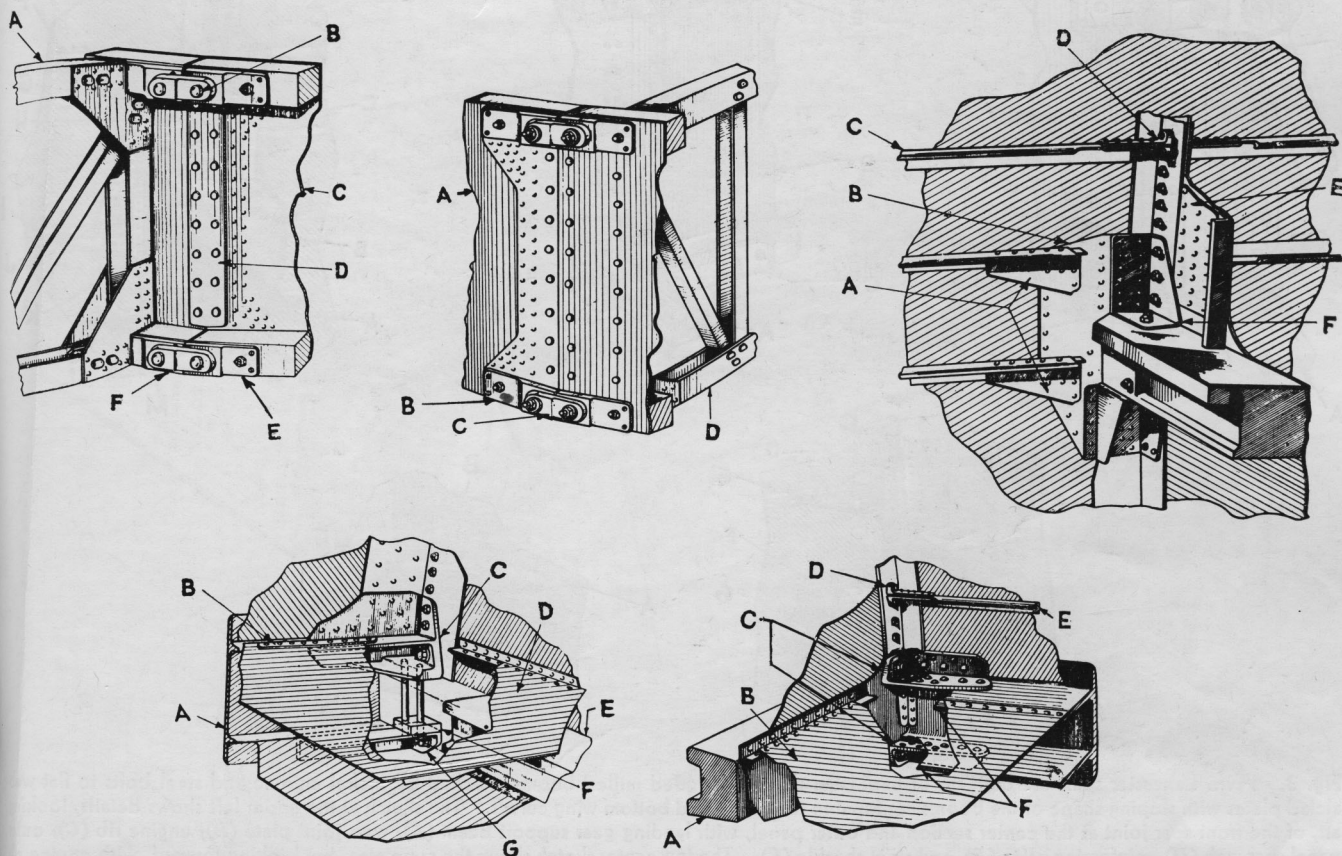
The sketch at the upper left shows details of the Lancaster rear spar center section-to-outer panel joint, with engine rib (A), boom joint pin (B), outer panel spar web (C), web joint plate (D), reinforcing plate (E), and steel shackle (F). The top center sketch is of same area, looking forward, with outer panel web (A), reinforcing plate (B), shackle (C), and engine rib (D). The upper right sketch shows the connection of the rear spar upper boom to the fuselage, with stringer brackets (A), gusset plate (B), stringer (C), stringer attachment angle (D), web joint plate (E), and shoe bracket (F). The lower left sketch gives details of the rear spar bottom boom-to-fuselage joint, looking aft. The fuselage longeron is at (A), strap plate at (B), corner bracket at (C), floor top at (D), spar boom at (E), packing block at (F), and corner bracket at (G). The lower right sketch gives details looking forward, with spar boom (A), floor top (B), corner brackets (C), stringer attachment angle (D), and stringer (E). The longeron has been cut away at (F) for clarity.
